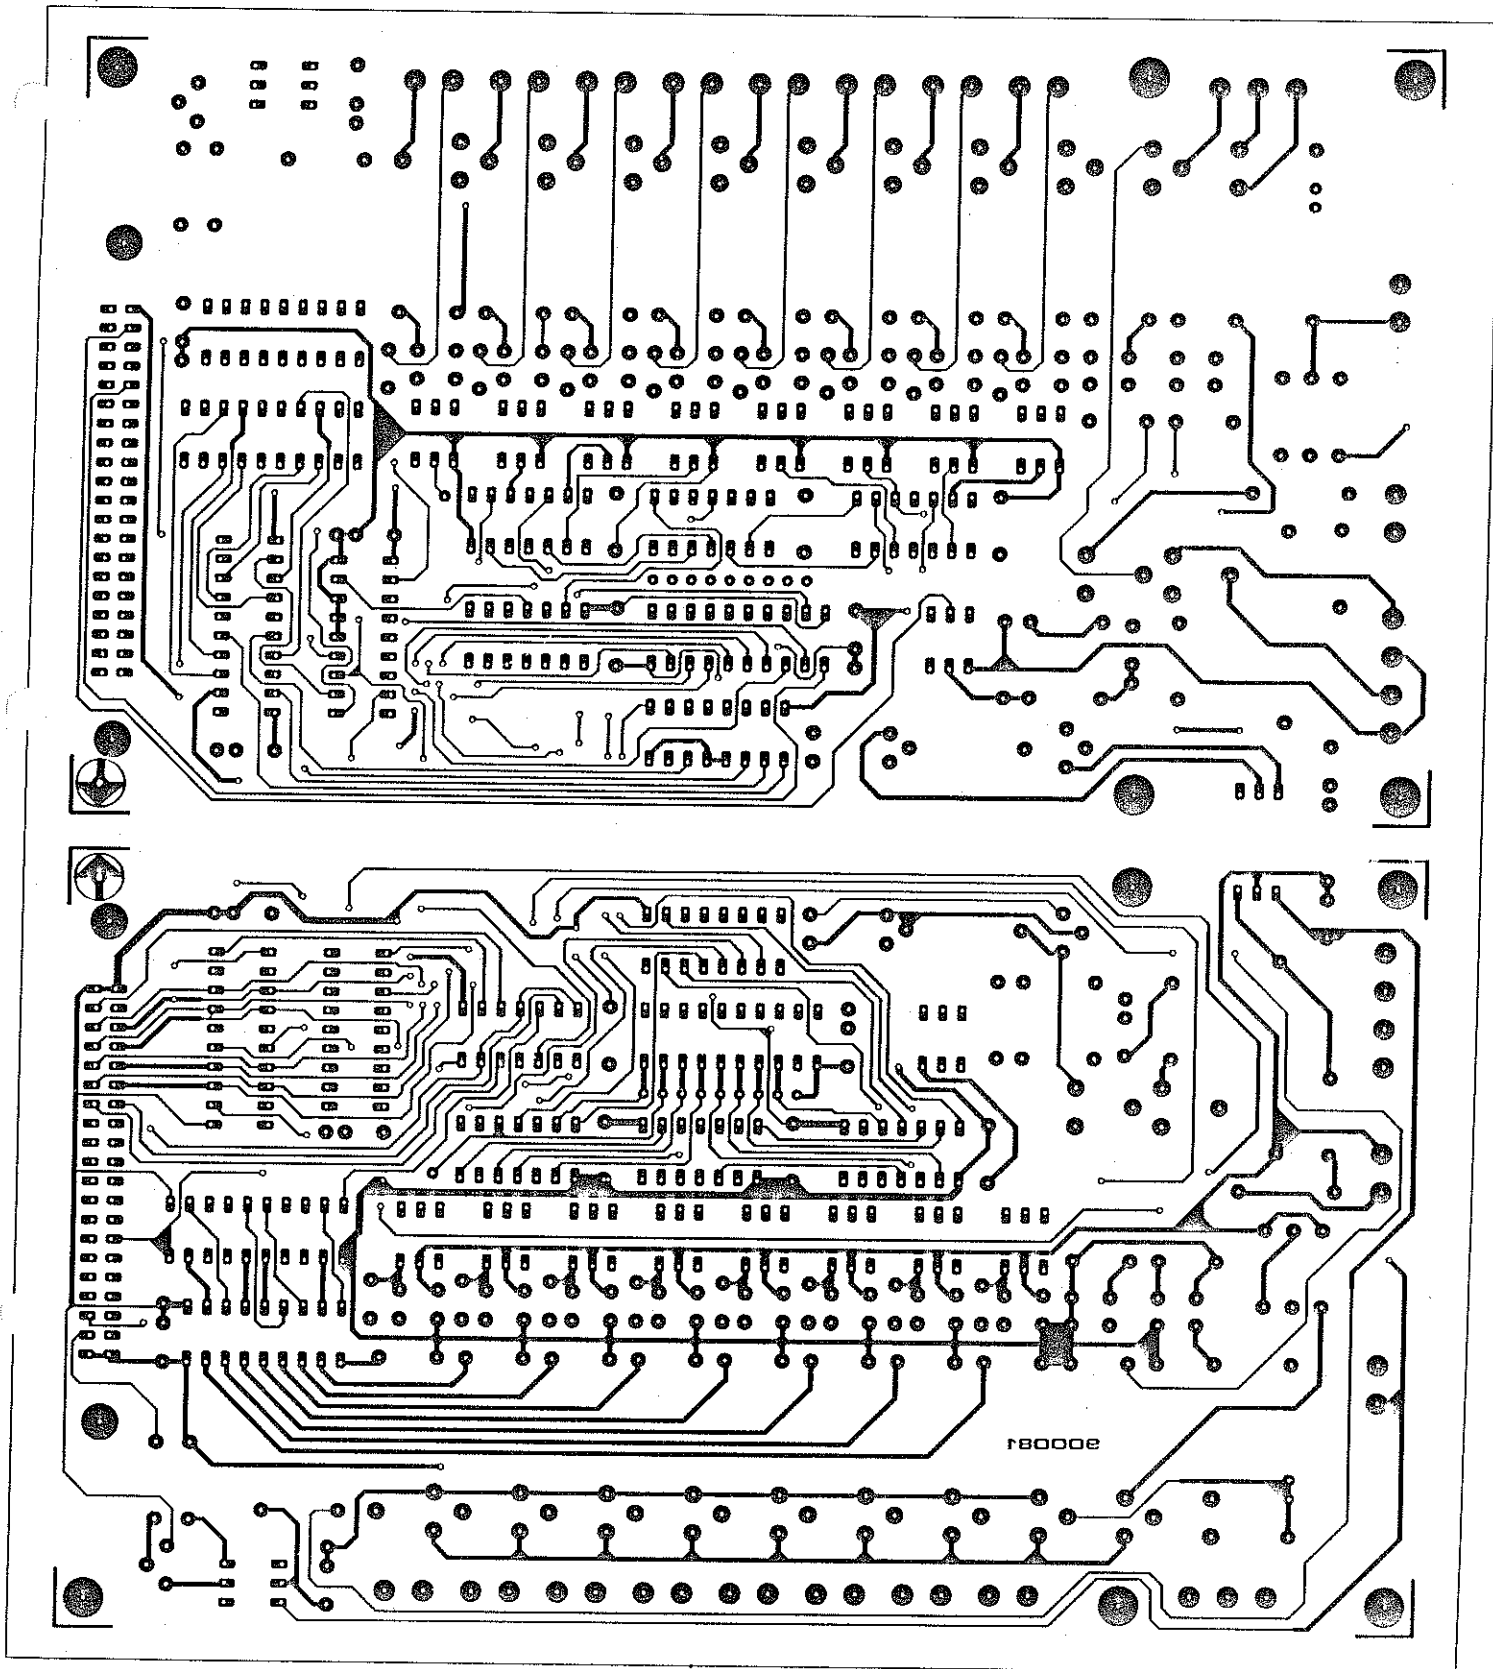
Track layouts of the double-sided, through-plated printed-circuit board.
